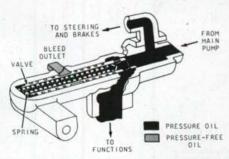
Cross sectional view of steering priority valve showing fluid flow. Pressurized fluid from main hydraulic pump enters valve. Steering line is always open to pump pressure; hydraulic systems line to functions is closed off when system pressure drops below 1650-1700 psi.
